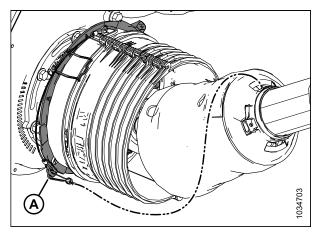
Driveline Safety Chain Secured to Float Module Gearbox
